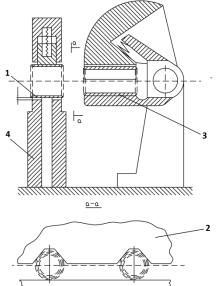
Mounting of a bush and a piece of type roll: the case in wich the prism of fixation is located in the upper.
